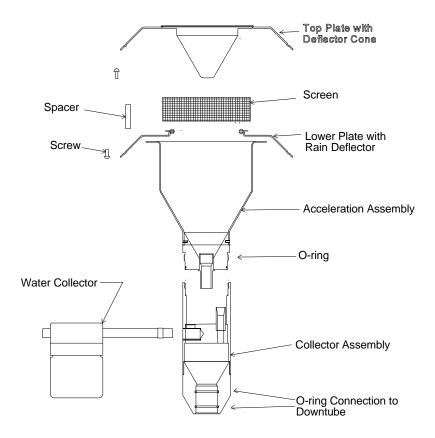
Exploded cross-sectional view of a PM₁₀ sampler inlet head.
